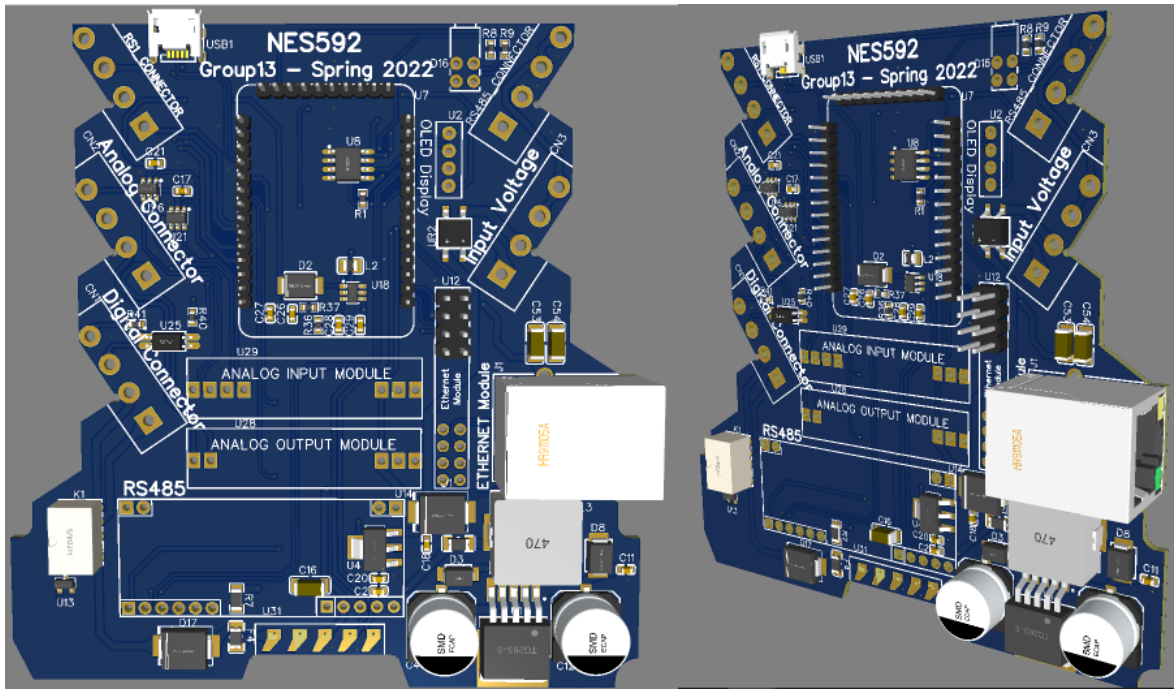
Top and Side View of the PCB of Flying Shear Controller
